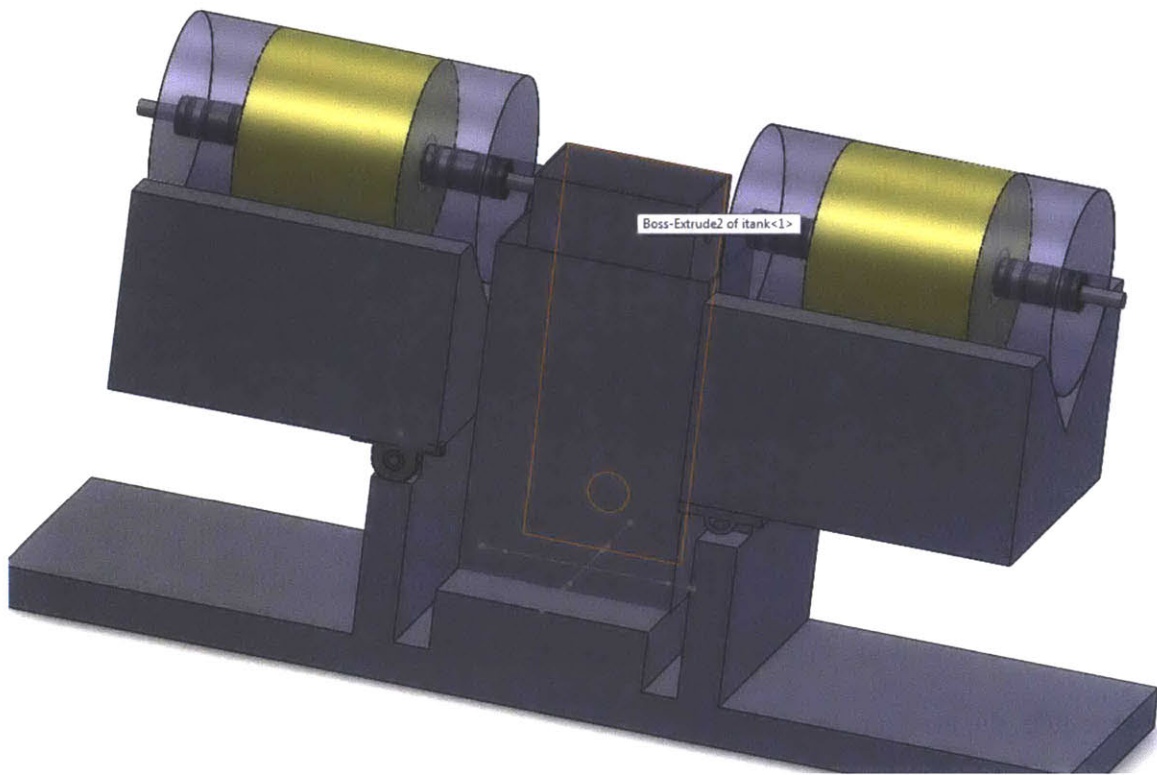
Concept design sketch using vee mounting blocks and cylindrical housings
